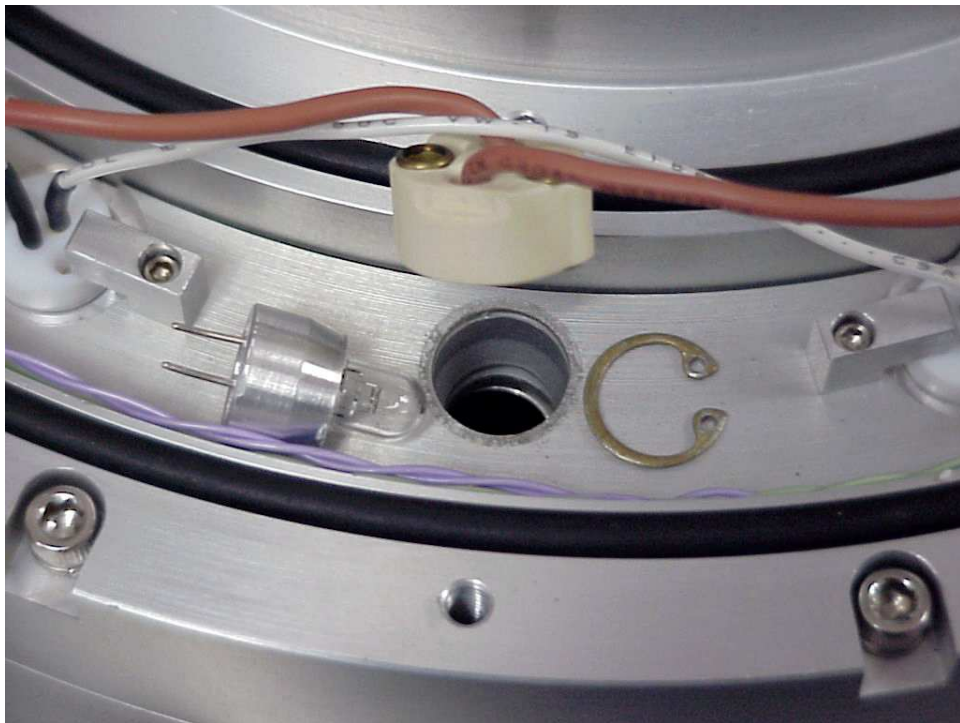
Larger socket removed, bulb out, with snap ring removed at right.
